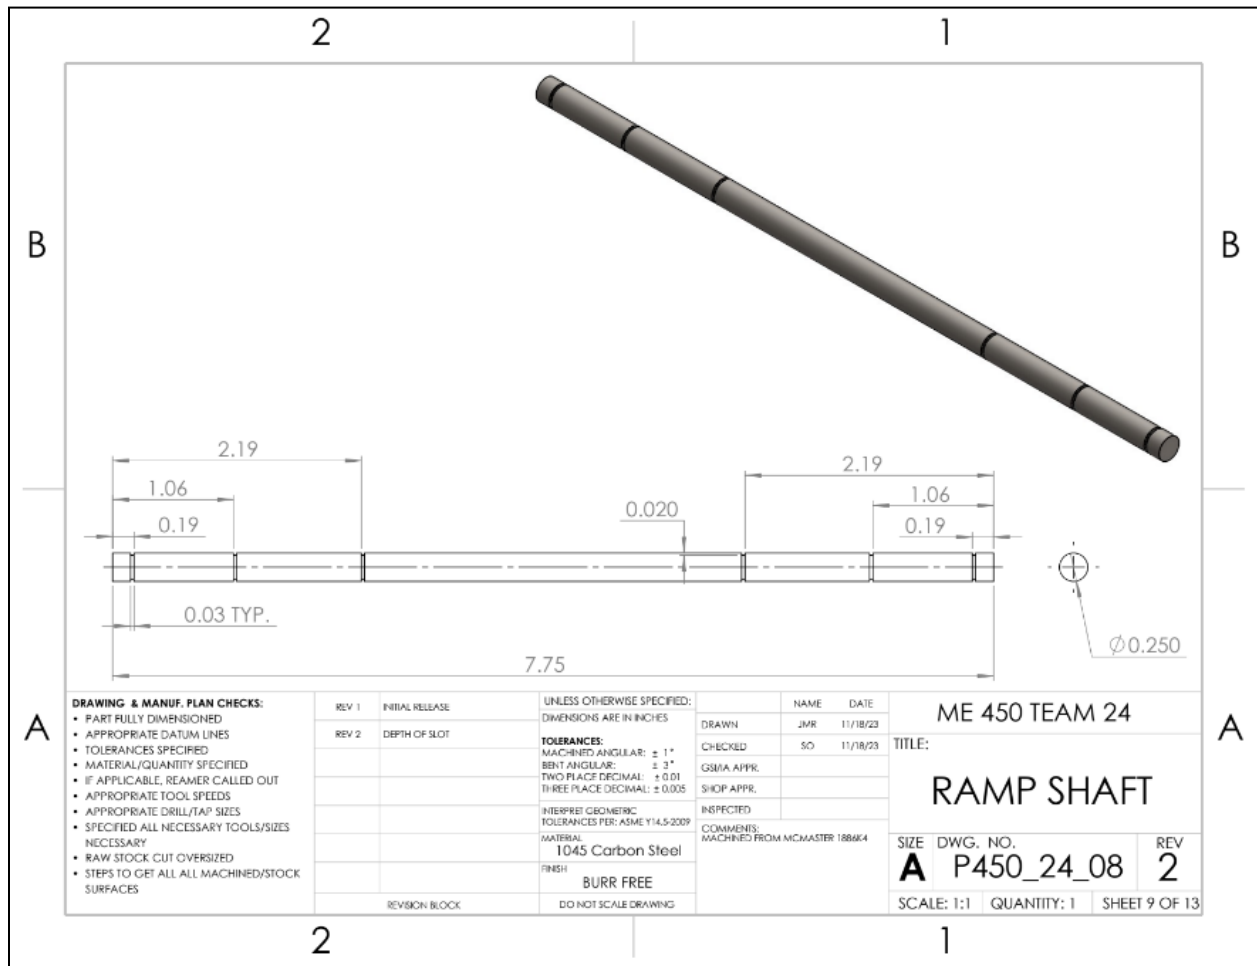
Manufacturing drawing for the ramp shaft component of the beta design.
